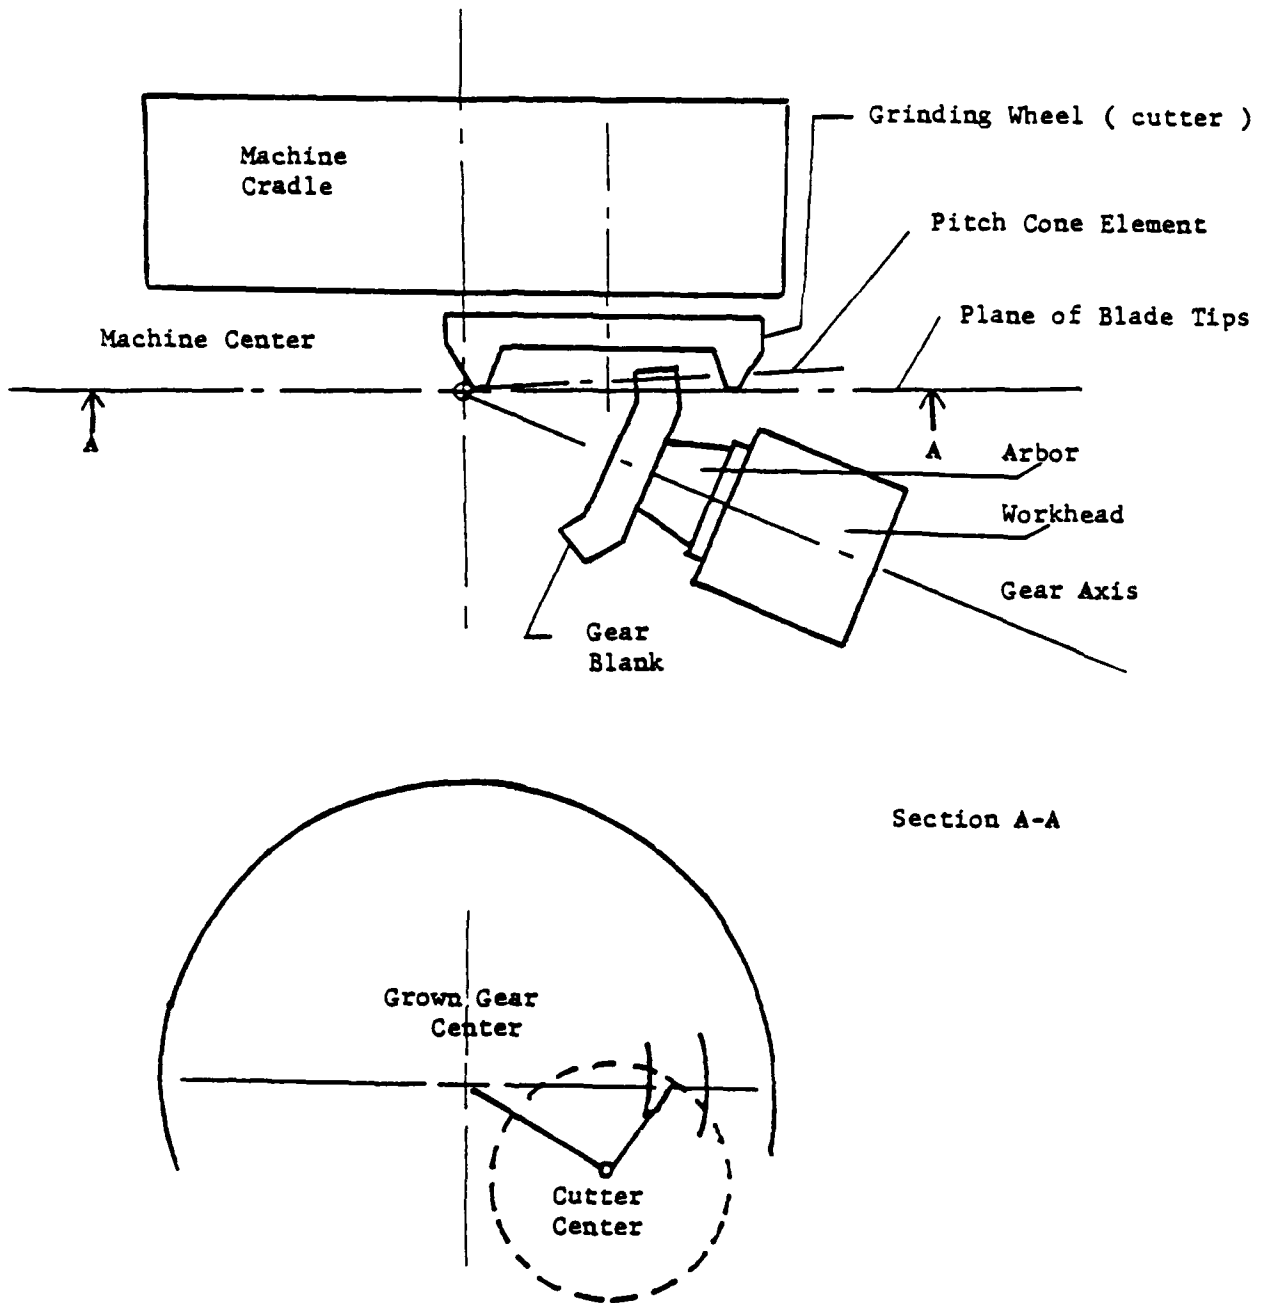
Gleason Cutting Process For Spiral Bevel Gears
